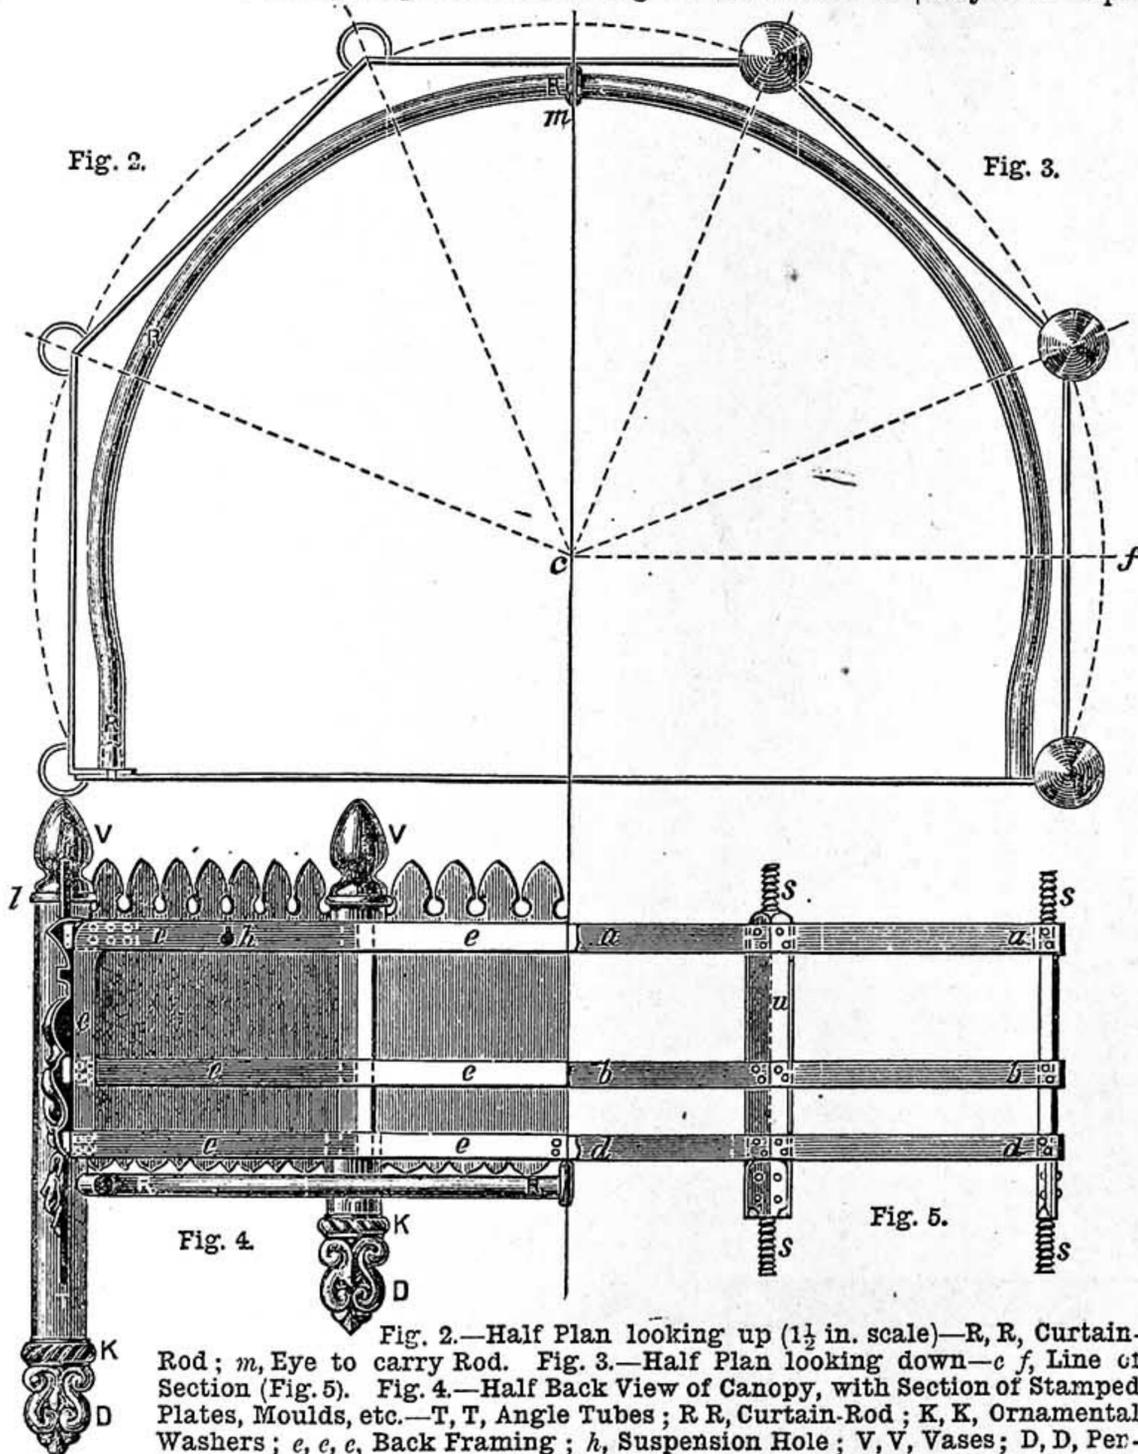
Half Plan looking up (1½ in. scale)—R, R, Curtain-Rod; m, Eye to carry Rod. Fig. 3.—Half Plan looking down—c, f, Line of Section (Fig. 5). Fig. 4.—Half Back View of Canopy, with Section of Stamped Plates, Moulds, etc.—T, T, Angle Tubes; R, R, Curtain-Rod; K, K, Ornamental Washers; e, e, e, Back Framing; h, Suspension Hole; V, V, Vases; D, D, Pendants or Drops. Fig. 5.—Half Section on c, f (Fig. 3); a, a, Top Bar; b, b, Middle Bar; d, d, Lower Bar of Octagonal Framing; s, s, s, s, Screws provided for Vases and Pendants (½ in. scale).
